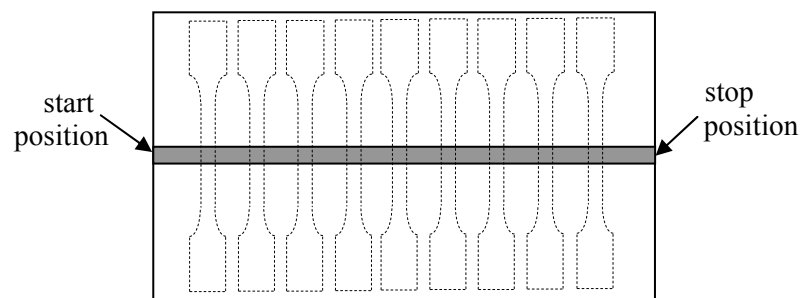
Production of the Specimens from a Larger, Welded Plate
